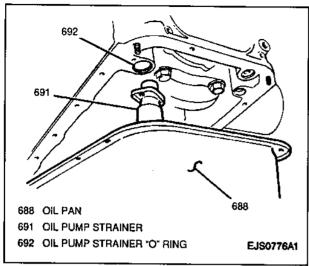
Installing Oil Pump Strainer and Engine Oil Pan
